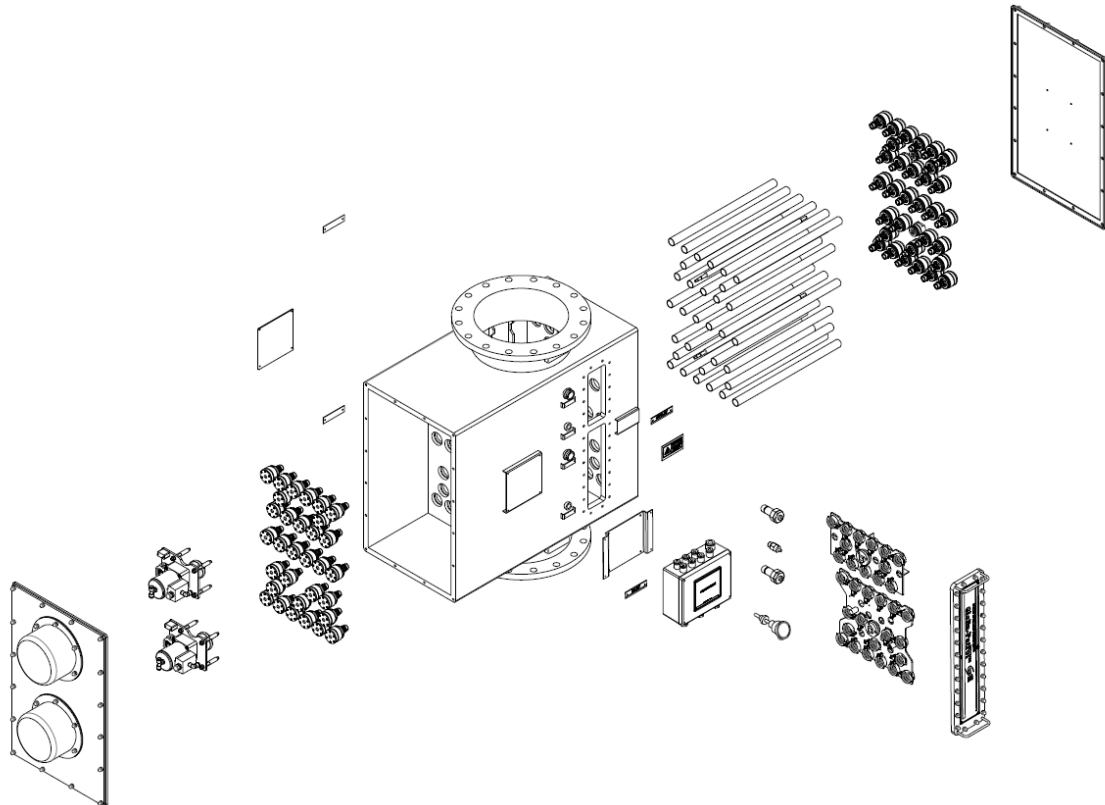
Disassembly of UV Unit Element (Wiper System)
